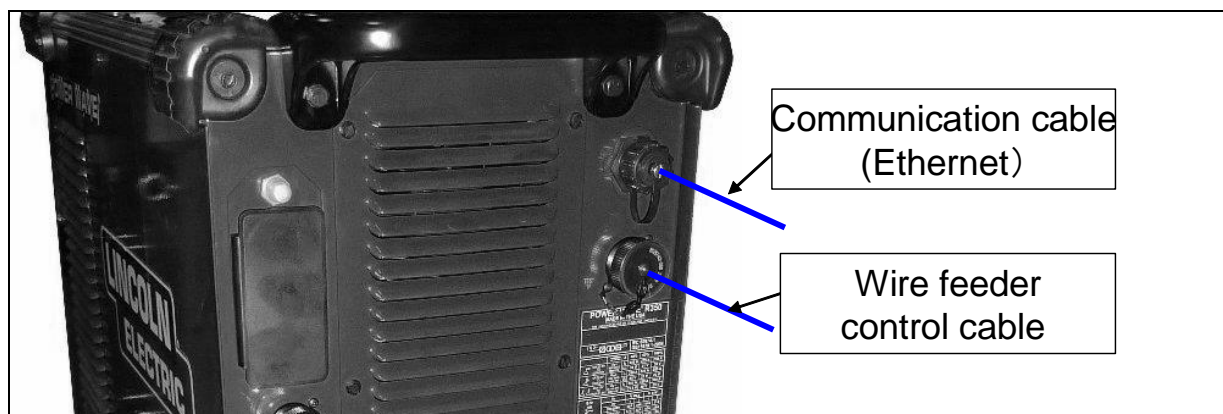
(d) Connection of Ethernet cable (welding power supply Power Wave R350, Power Wave S350 )
